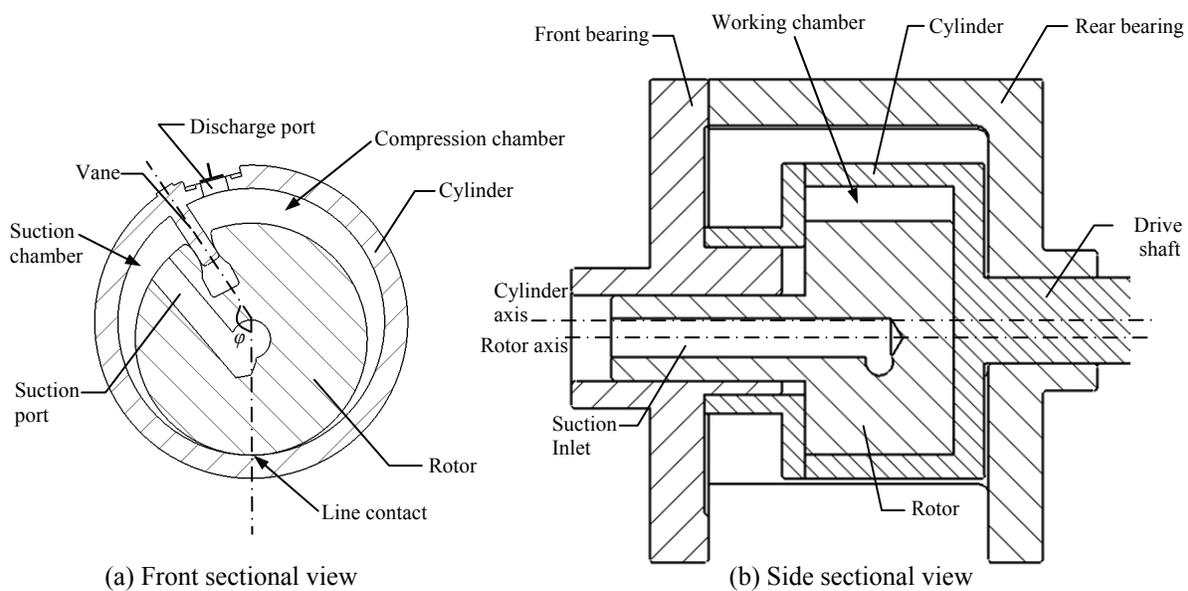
Sectional views of RV-i compressor with the vane fixed on the cylinder. It is better to directly drive the cylinder in this case.
